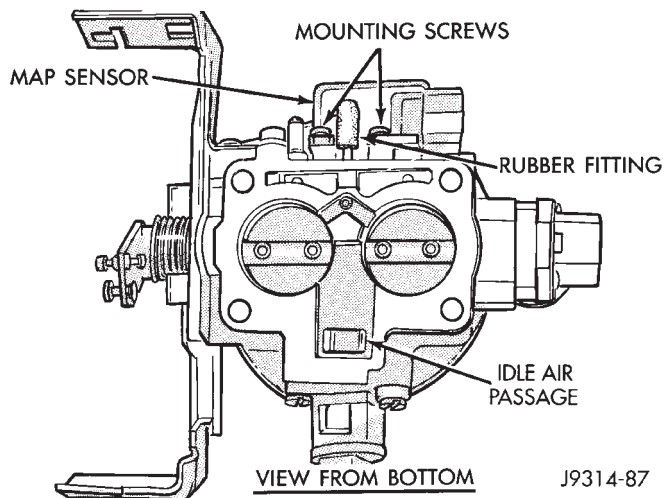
MAP Sensor L-Shaped Rubber Fitting
